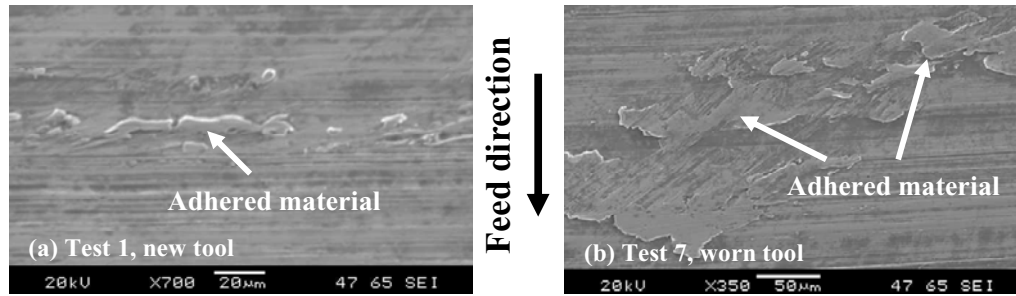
Drilled surface; (a) Test 1, hole 1; (b) Test 7, hole 40
